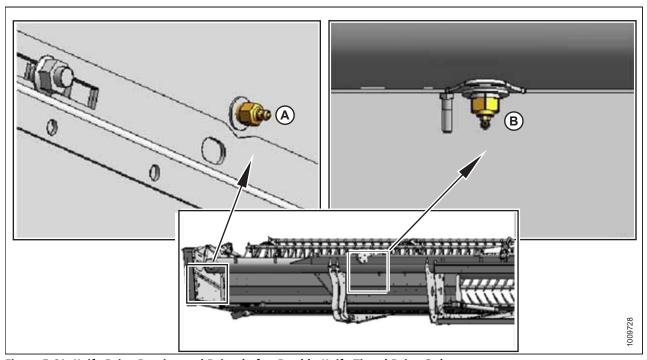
Knife Drive Bearing and Driveshaft – Double-Knife Timed Drive Only
